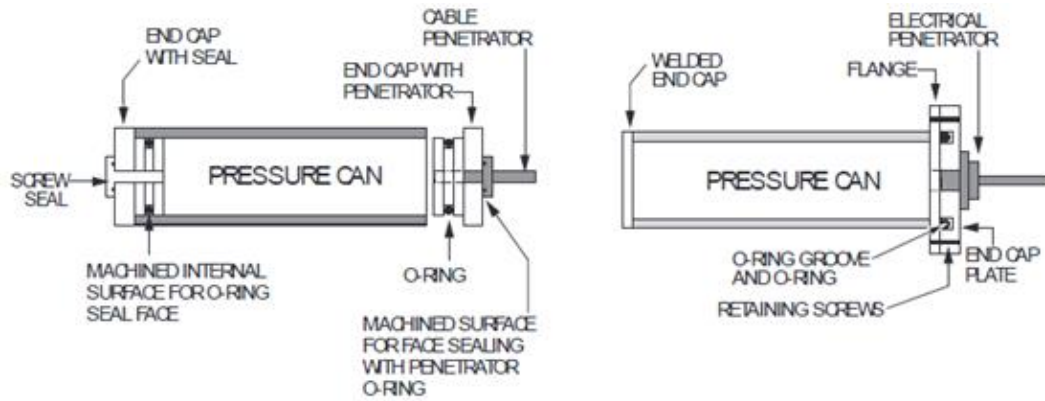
Piston type (left) and flange type (right) pressure canister seals. [9]
